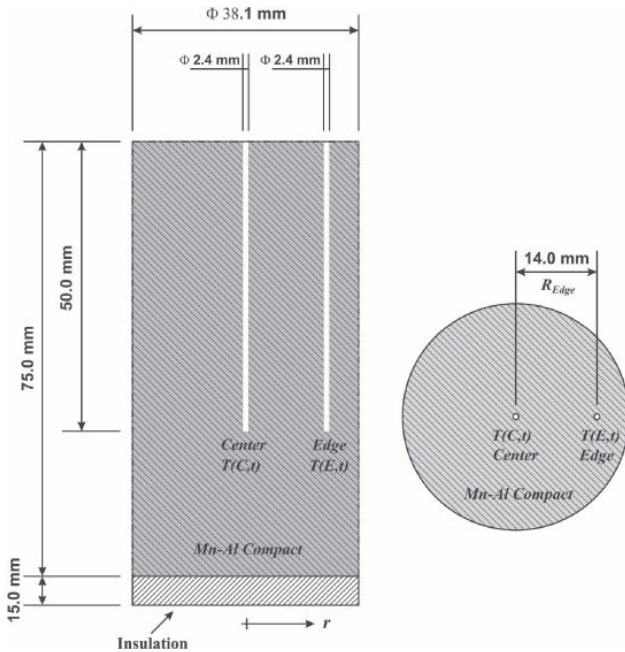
Dimensional details of manufactured Mn-Al cylindrical compact specimens.
